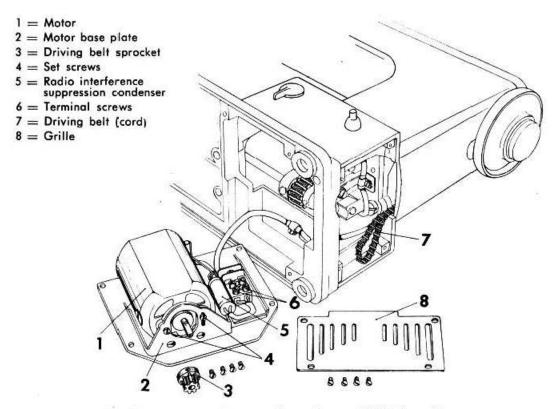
Demounting the motor base plate on Pfaff 360 machines
